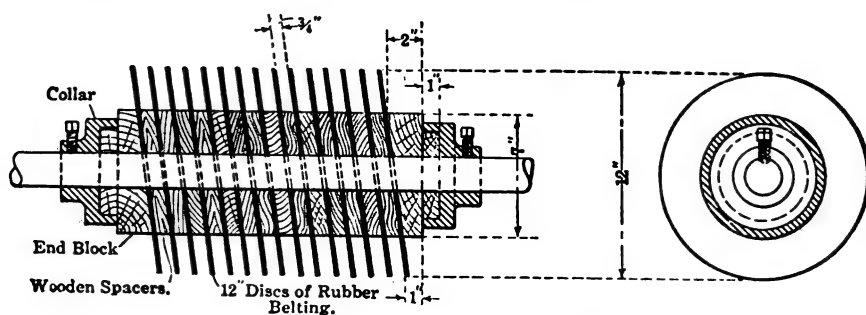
CONVEYOR BRUSH MADE OF RUBBER DISKS.
